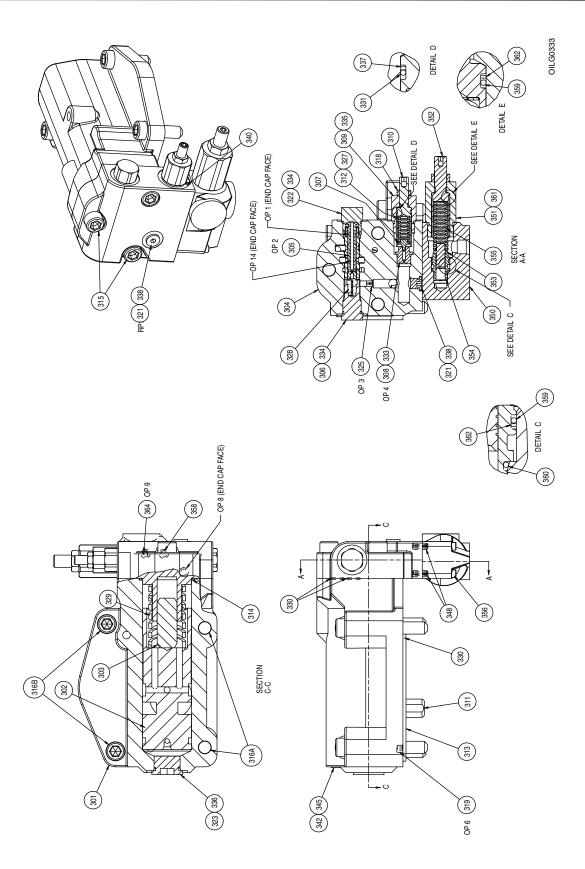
Cross Section Parts Drawing for "P-1NN/F" Single Pressure Compensator, Series F1U Control (516336-200 sheet 2)
